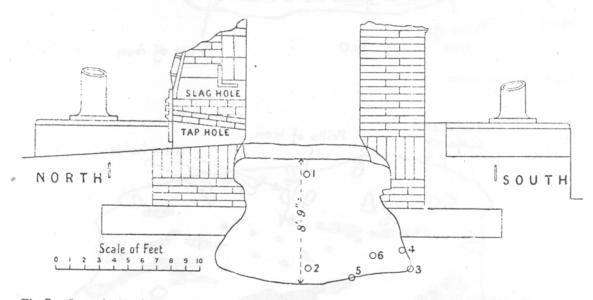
Ormesby No. 4 furnace bear, removed November 1914-April 1918
